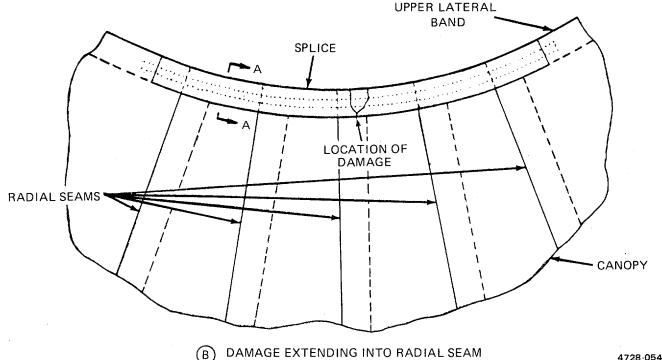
Vent Reinforcement Band Splicing Details. 2-67
